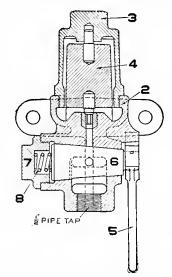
Pressure Retaining Valve for 12 in., 14 in, and 16 in. Brake Cylinders.
